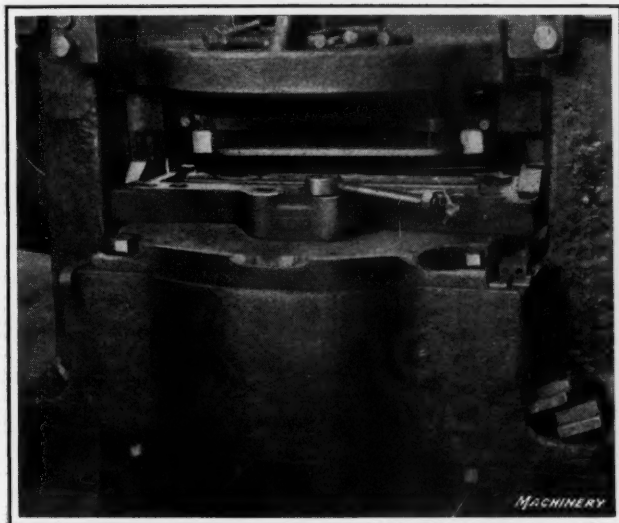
Press equipped with a Two-pillar Shearing Die for trimming Gear Guard Shells
